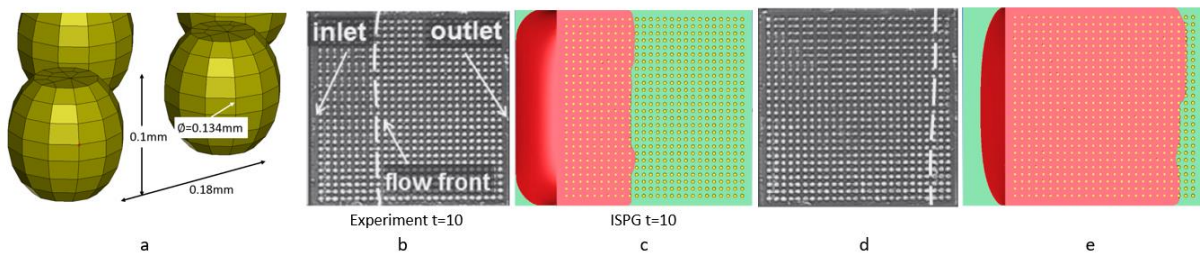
Underfilling of 676 solder balls of a flip-chip BGA (time unit: s).
